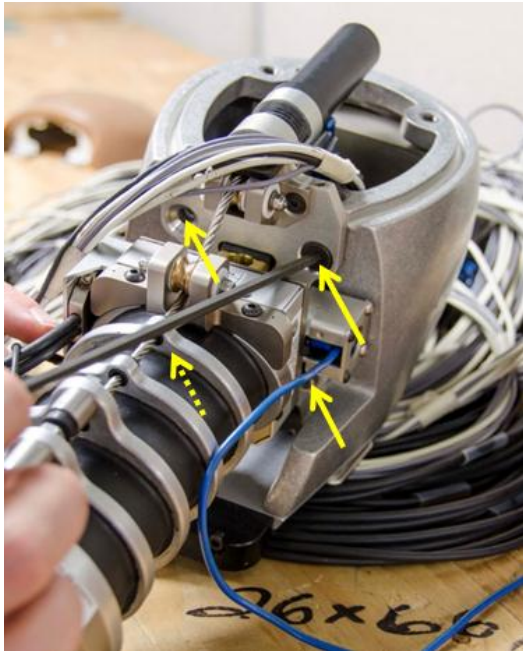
FHCS connecting head/neck mounting platform to skull assembly.
